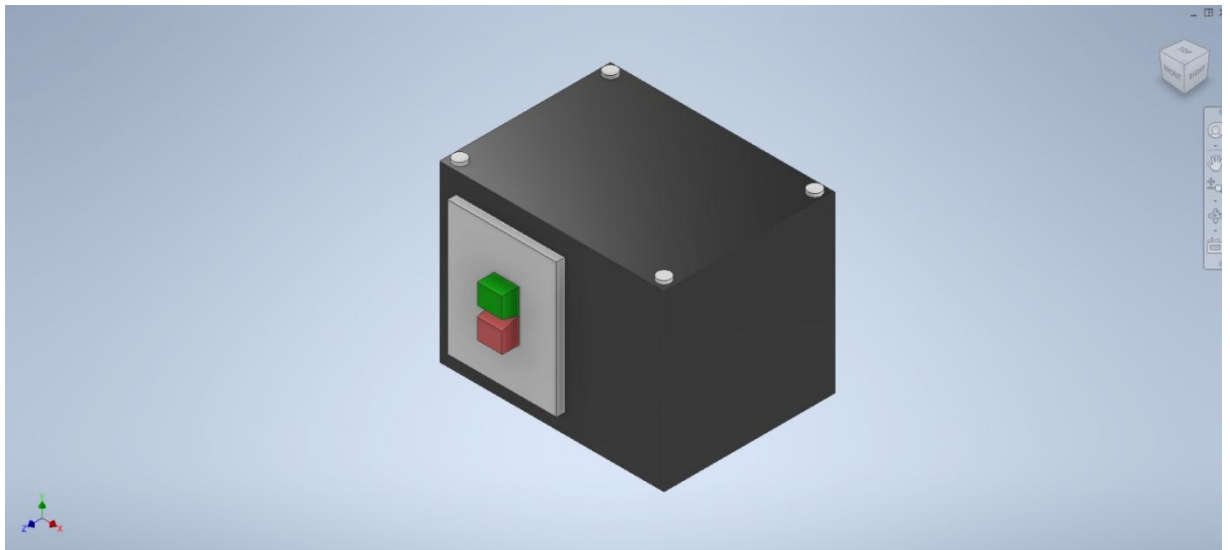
Drawing Of The Controller Box To Control Automatic Vise
